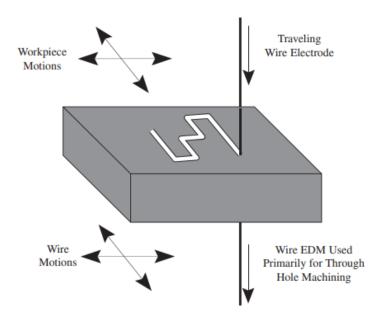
Wire electrical discharge machine showing contact between electrode and workpiece.
